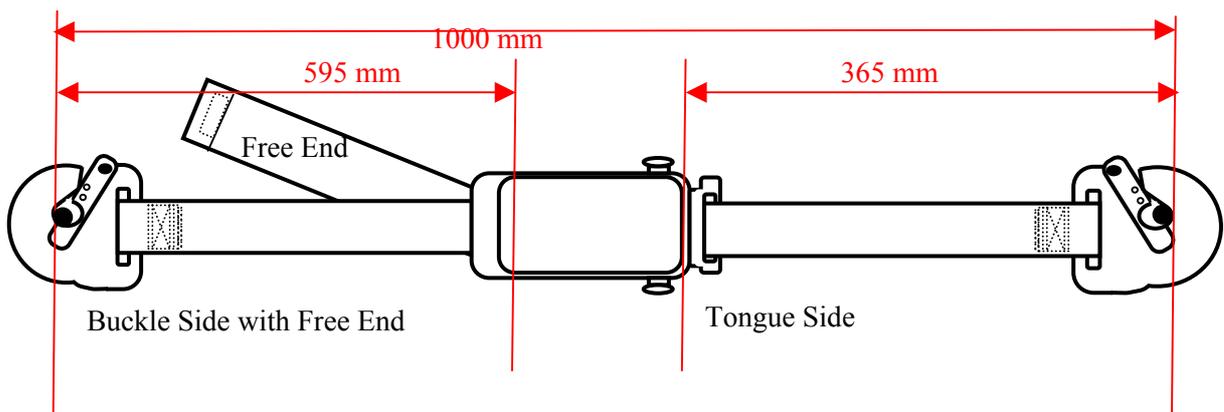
Schematic of the belt dimensions in the Static Test Fixture
